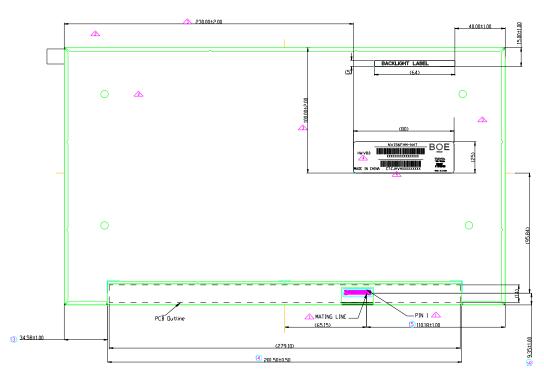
TFT-LCD Module Outline Dimensions (Rear view)
